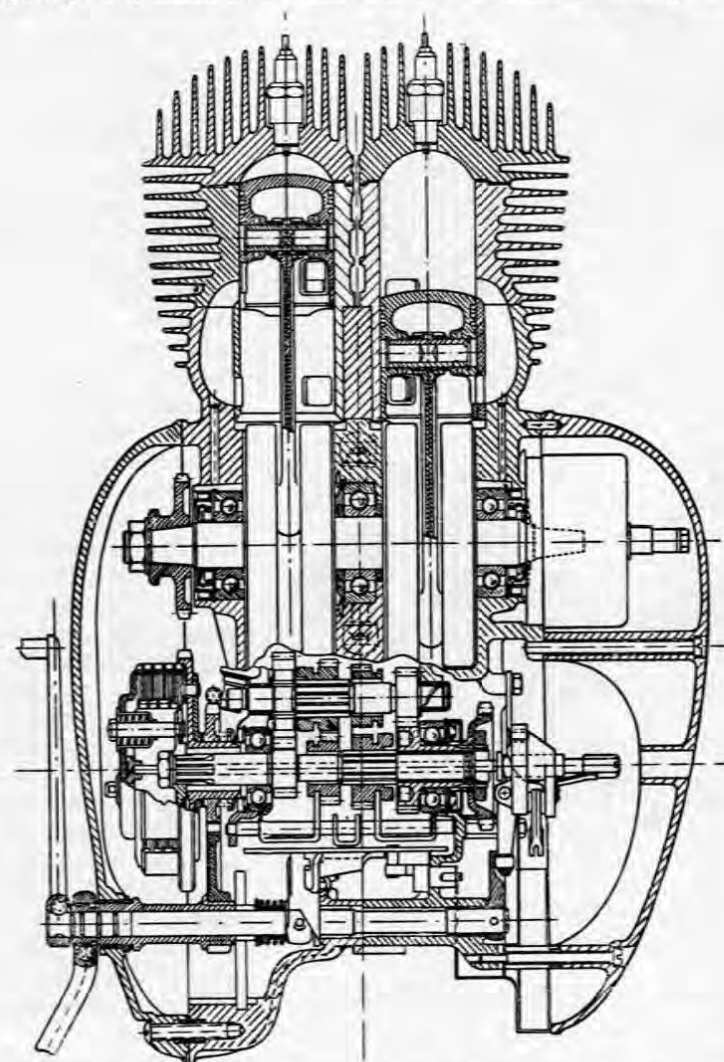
Two-cylinder two-stroke Jawa 350 cu. cm motor-cycle engine.
